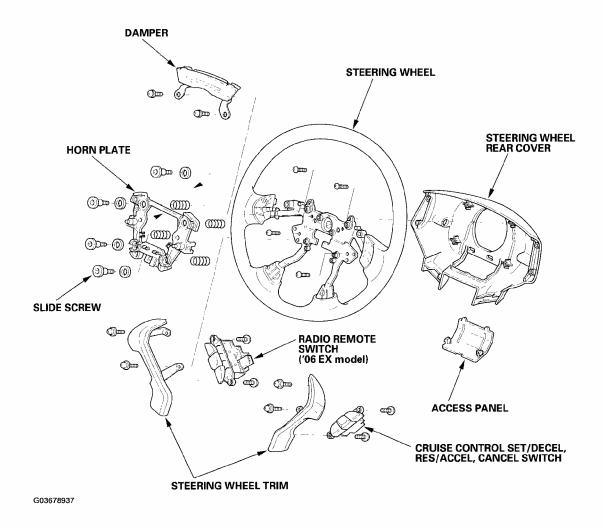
Exploded View Of Steering Wheel Courtesy of AMERICAN HONDA MOTOR CO., INC.
